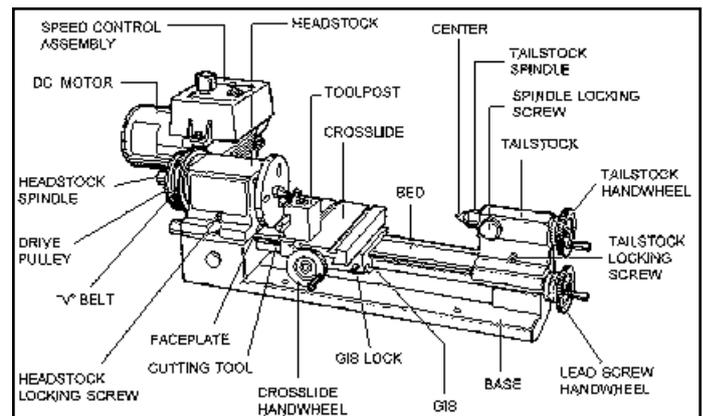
Parts of Sherlin Lathe showing vertical position of various components.
